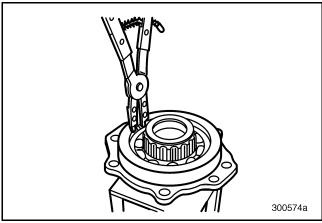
Removing Main Drive Pinion Cover Bearing Snap Ring
